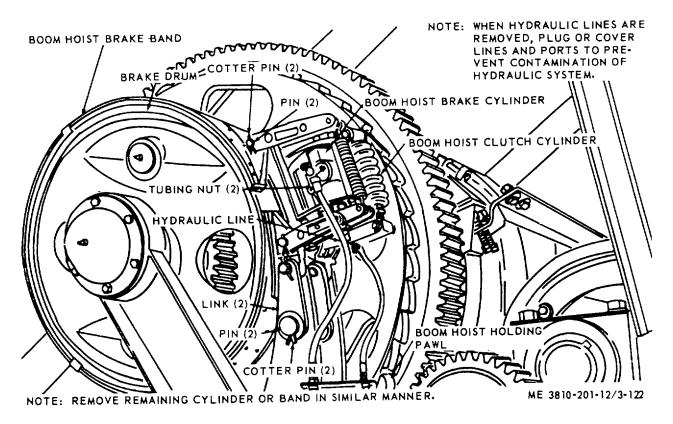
Boom Planetary or hoist brake band, removal and installation.
